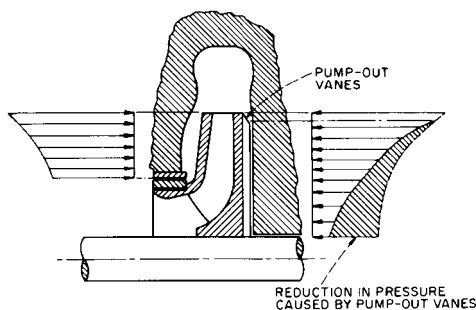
Pump-out vanes used in a single-suction impeller to reduce axial thrust
